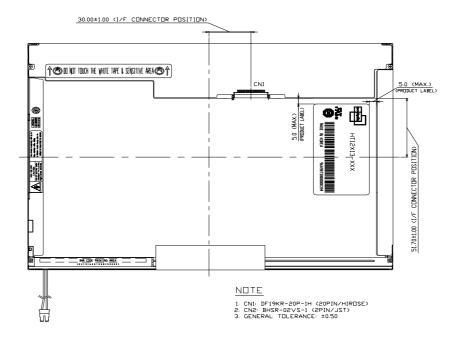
TFT-LCD Module Outline Dimensions (Rearview)
